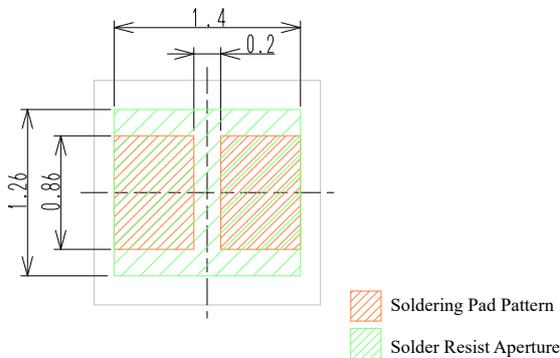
NCSxE17A Recommended Soldering Pad Pattern
